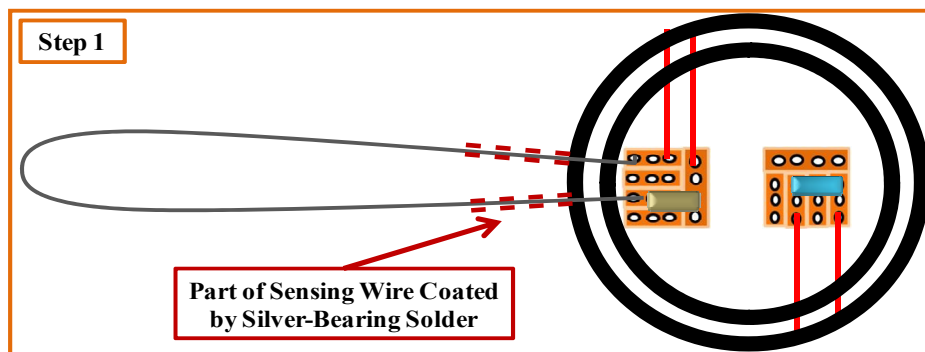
The coating location of the sensing wire after finishing the circuitry of the sensor.
